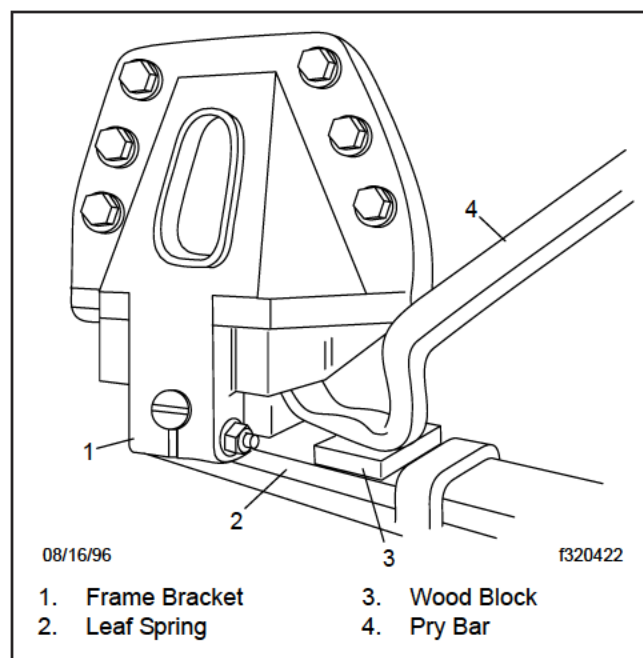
, Hendrickson RTE Series Frame Bracket Inspection
